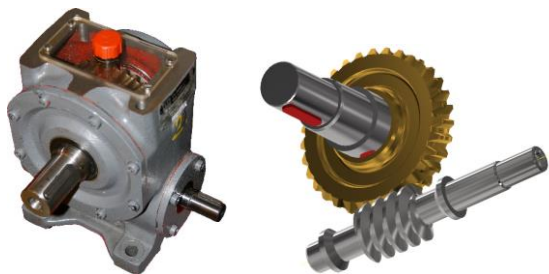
Worm reducer Z80-J-010-P and 3D model of a worm gear
